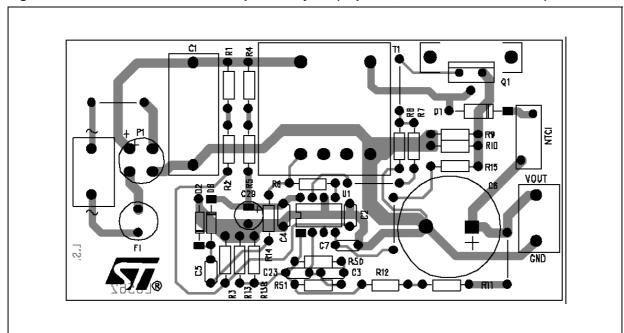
EVAL6562N: PCB and component layout (Top view, real size: 57 x 108 mm)
